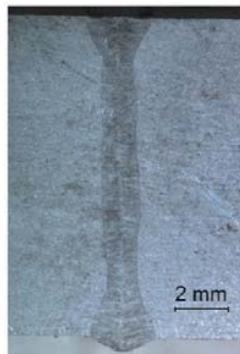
Example of high depth to width ratio ($d/w \sim 9:1$) single-pass weld cross-section characteristic for high-power thick section laser welding. Material: type 304 austenitic stainless steel with plate thickness of 12 mm; Laser power 10 kW; Focal spot diameter $\phi 0.4 \text{ mm}$; welding speed 2.4 m/min. (Zhang et al., 2014)
